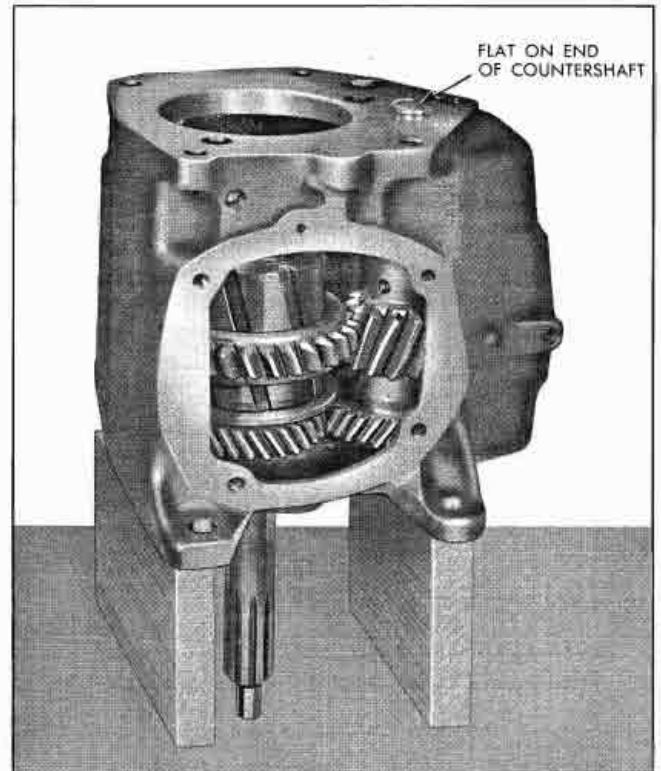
Position of Transmission Case Assembly for Installation of Mainshaft Assembly
